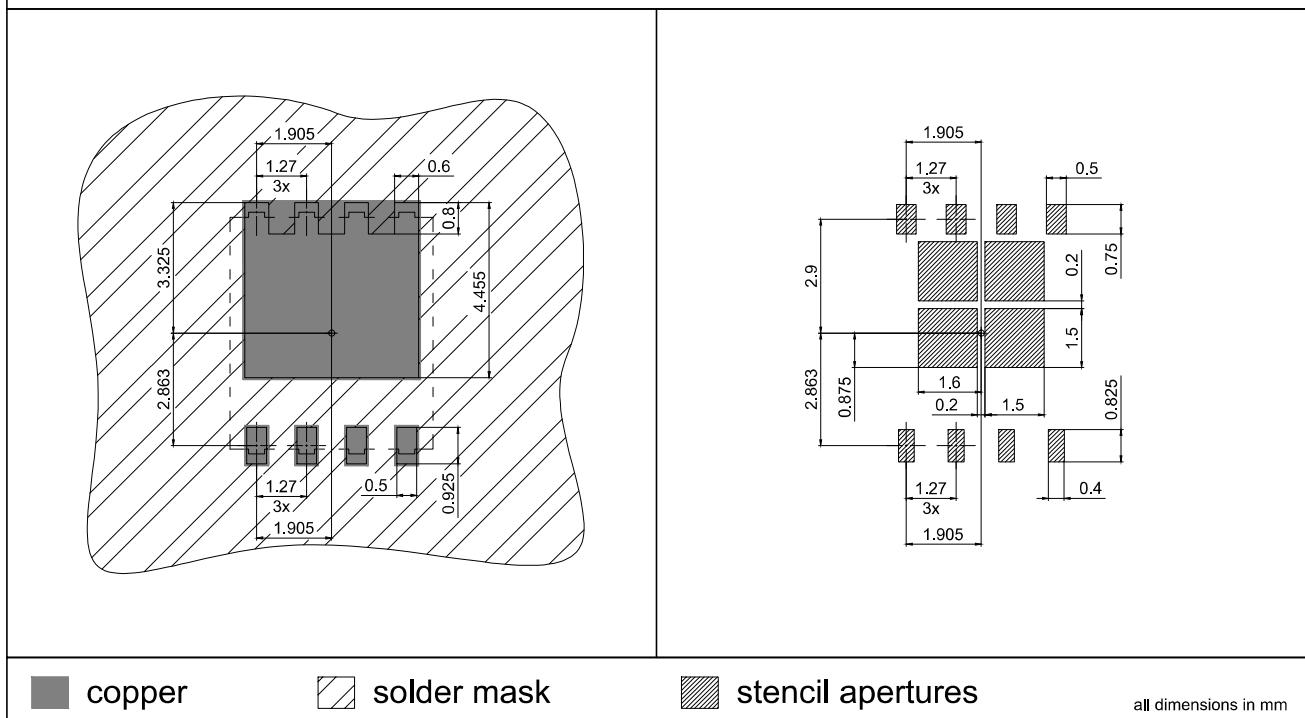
Outline Boardpads (TDSON-8), dimensions in mm
